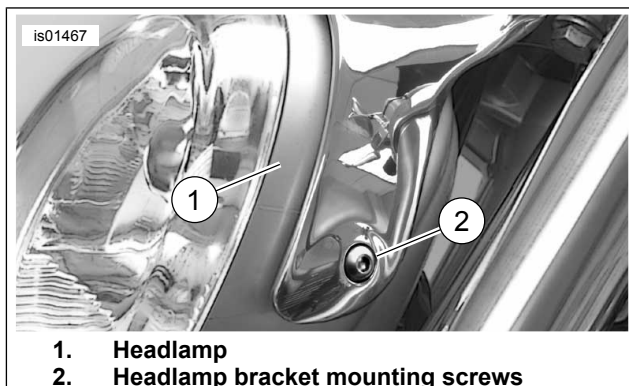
Remove Headlamp Mounting Screws (Left Side Shown)
